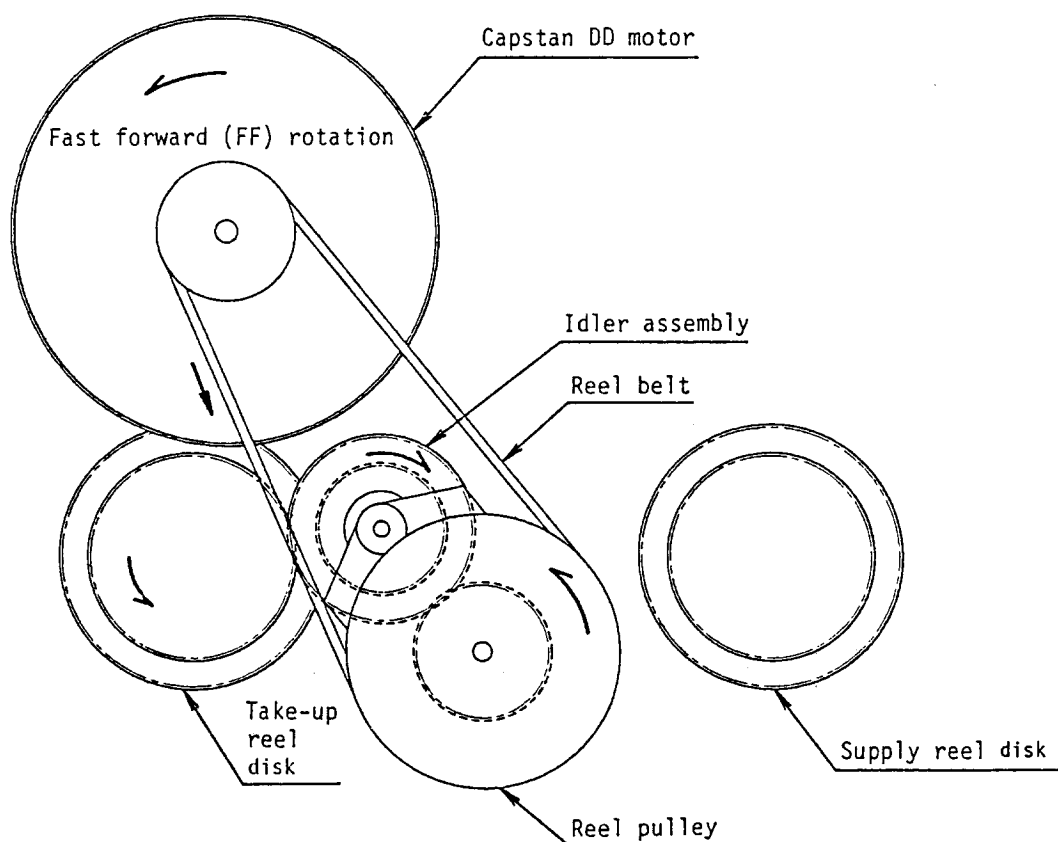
Cassette Tape Take-up Mechanism 1 (Lower stage)
